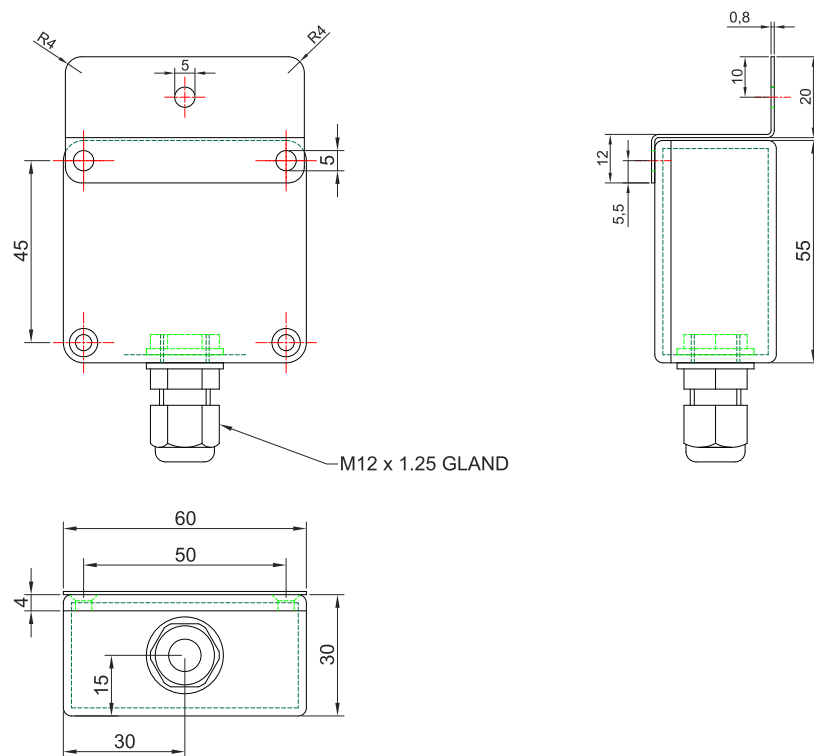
ProReact EN Analogue End-of-line Unit Dimensional Drawing
